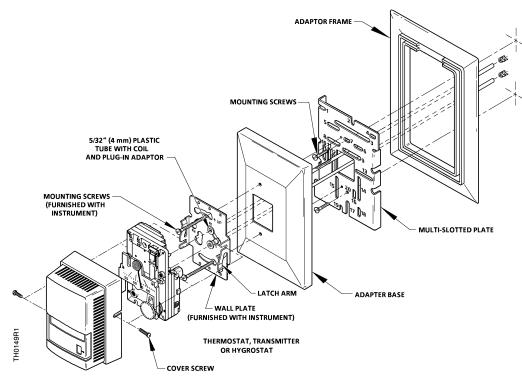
Thermostat Mounting with Universal Kit – Option 1.
